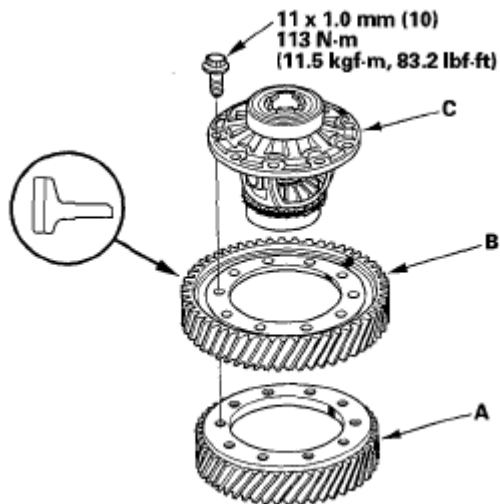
Identifying Transfer Drive Gear, Final Driven Gear And Differential Carrier With Torque Specification
